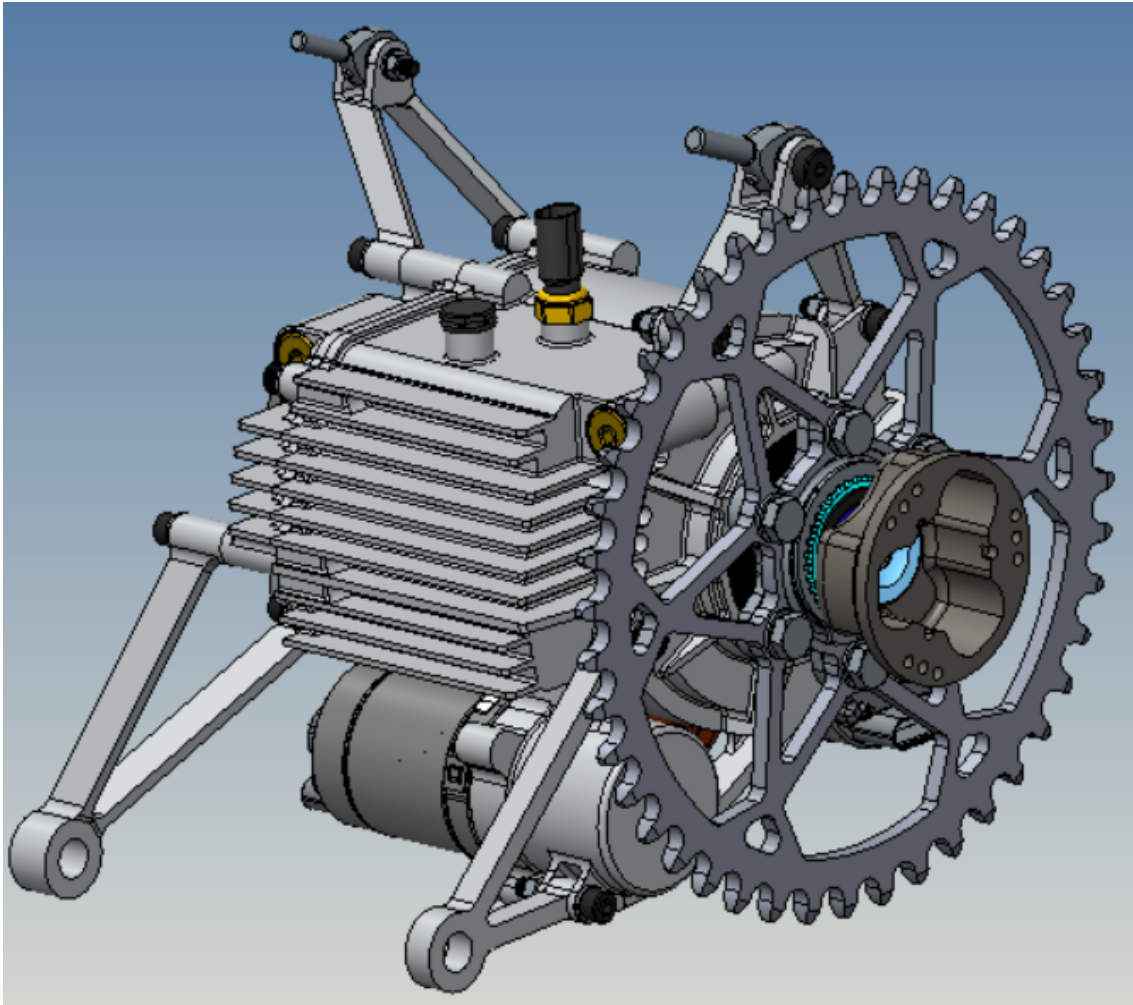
Complete assembly with Gen VI actuators and 44-tooth sprocket
